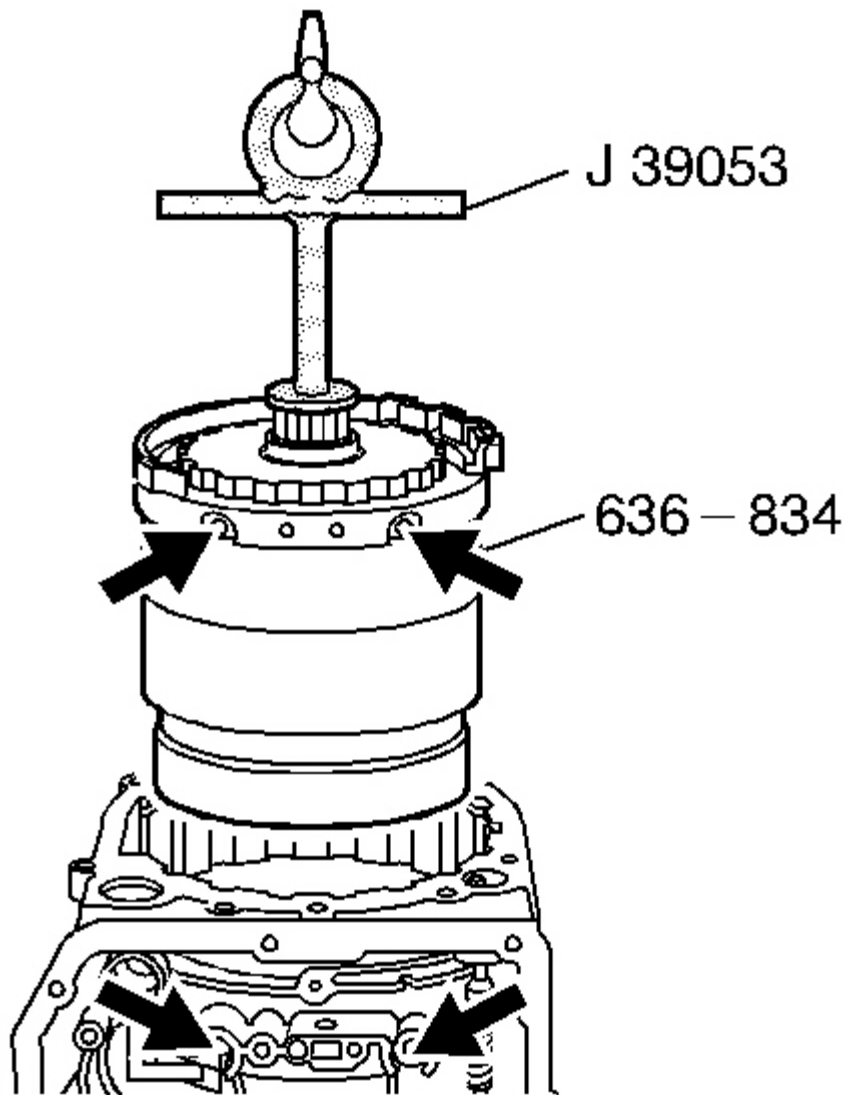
Installing The Forward And Coast Clutch And Support Assembly (636-834) Into The Barrel Of The Case
